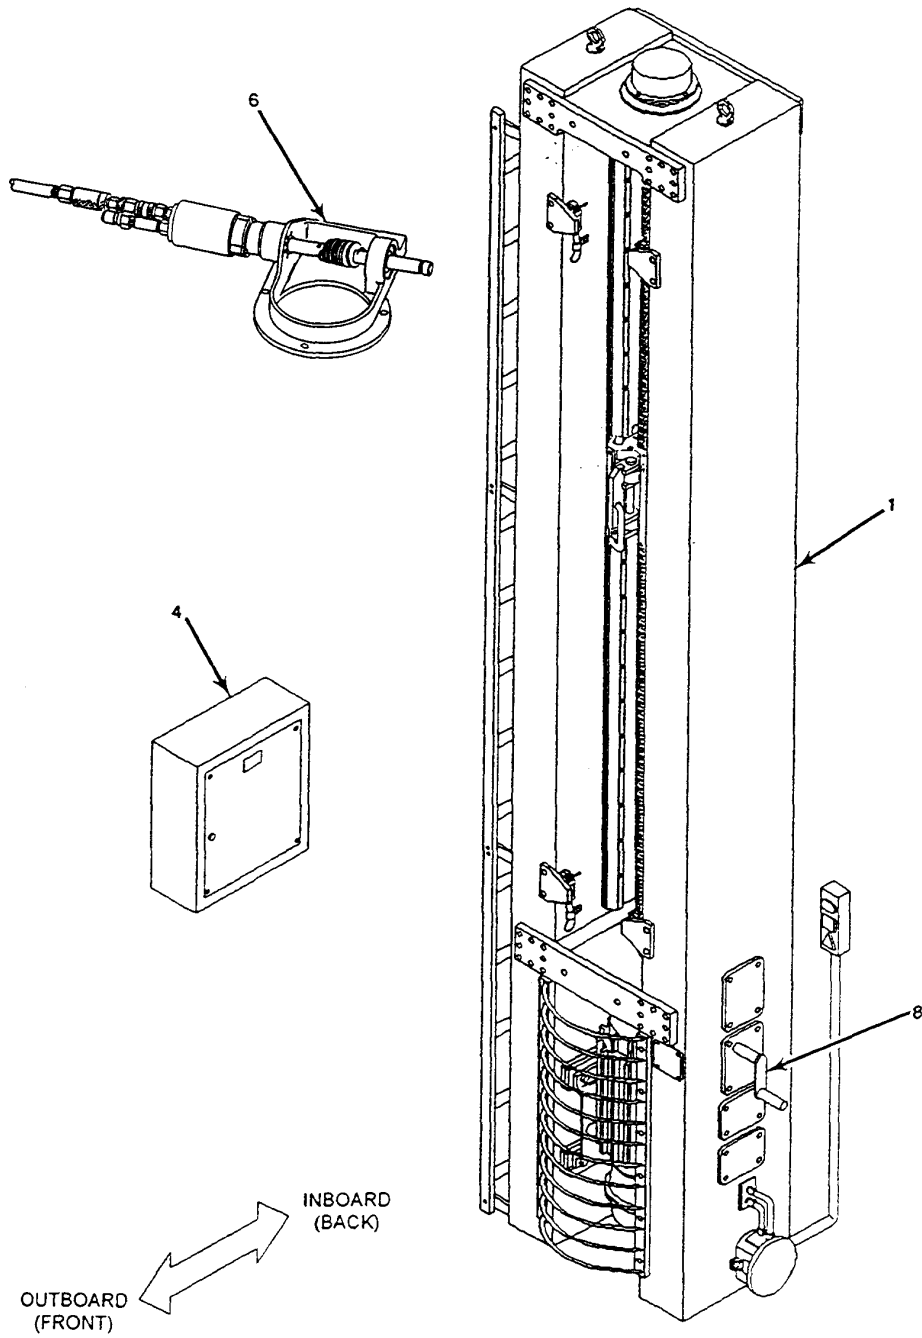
Sliding Padeye Assembly Installation (Sheet 1 of 2)
